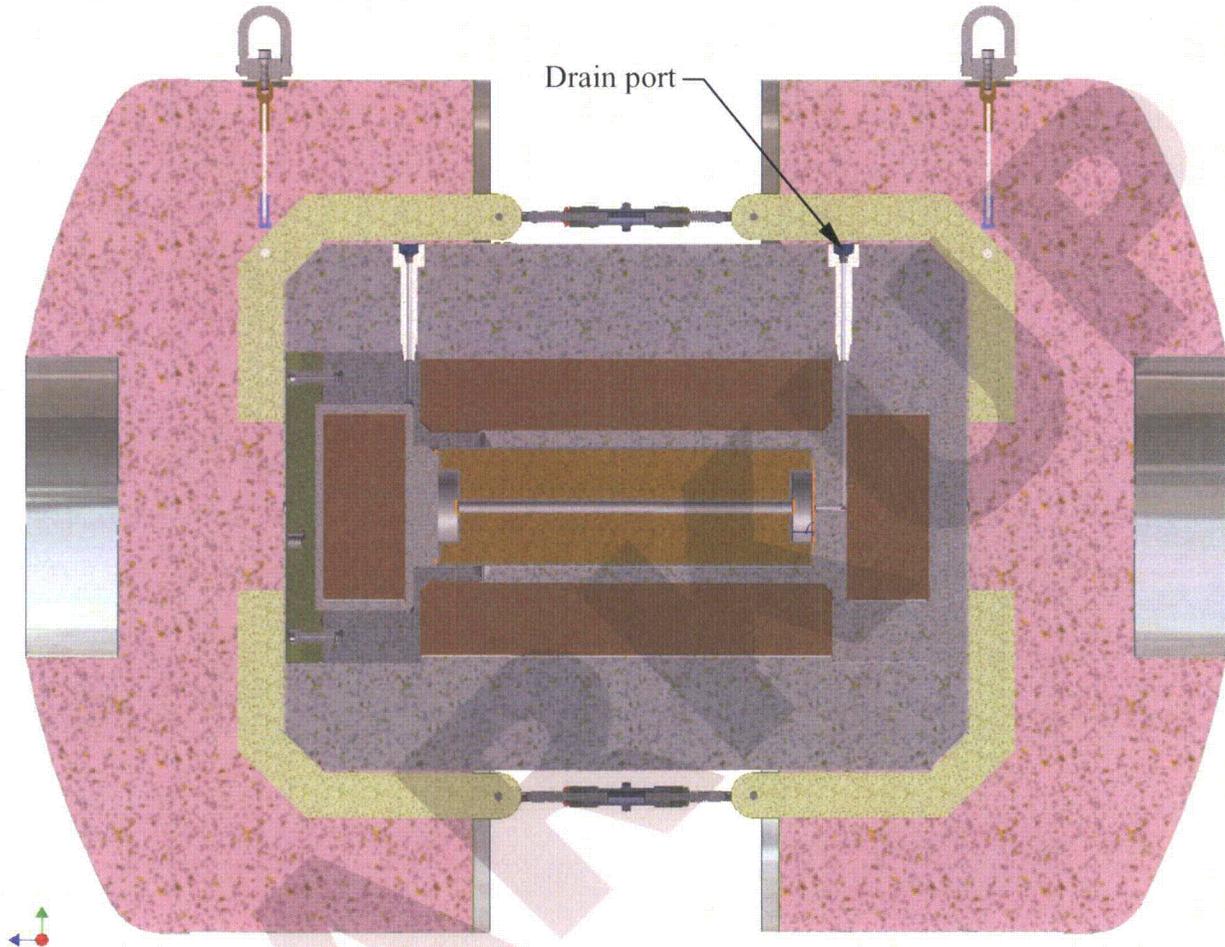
Cross section of cask showing drain port to be used for accelerometer cable routing.
